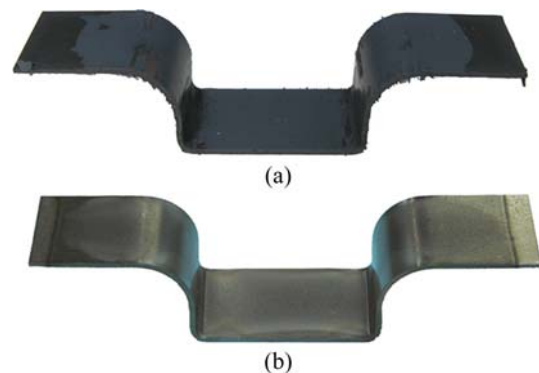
Comparison between hat-shaped sheets by hot-stamping processes using furnace heating (a) and resistance heating (b)
